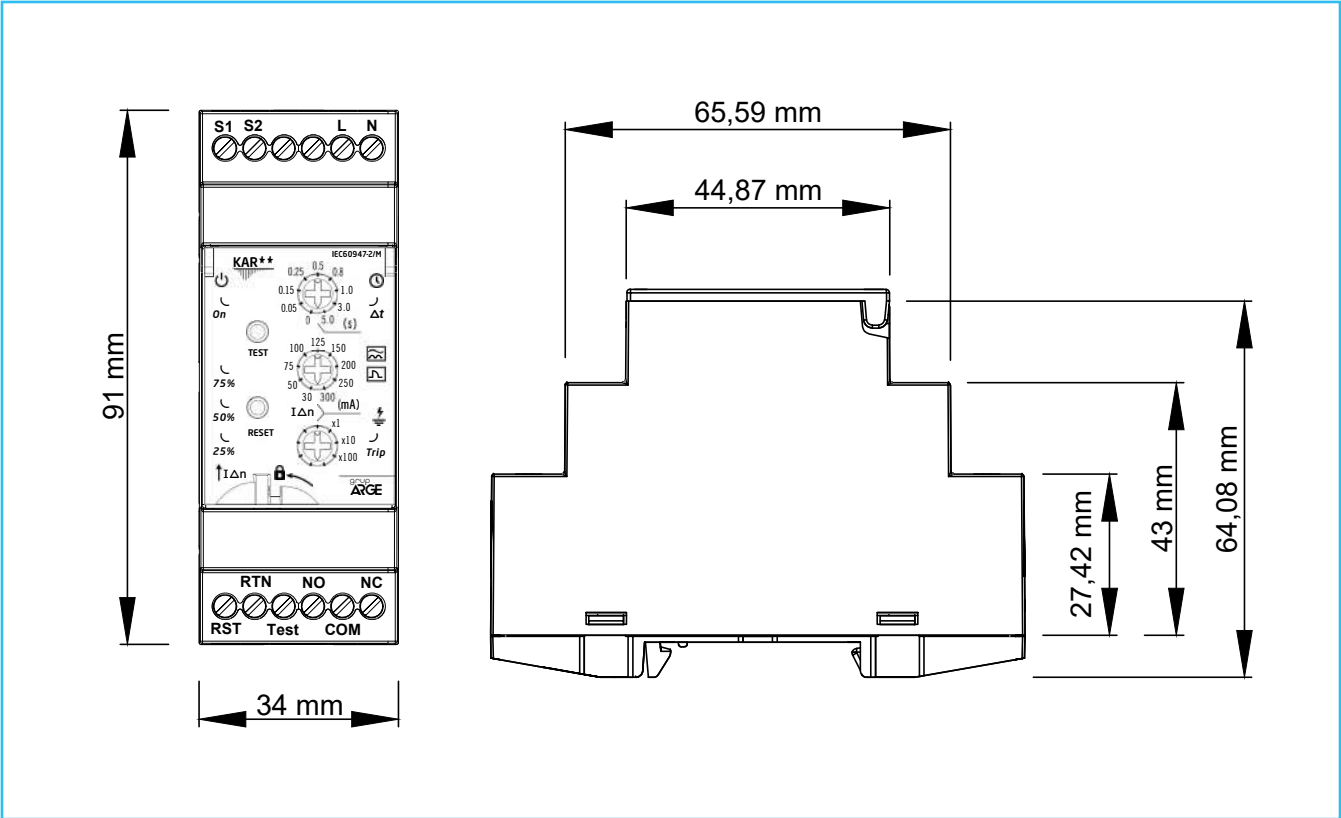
KAR01-KAR11 Toroidal Leakage Current Relay Teachnical Drawing
